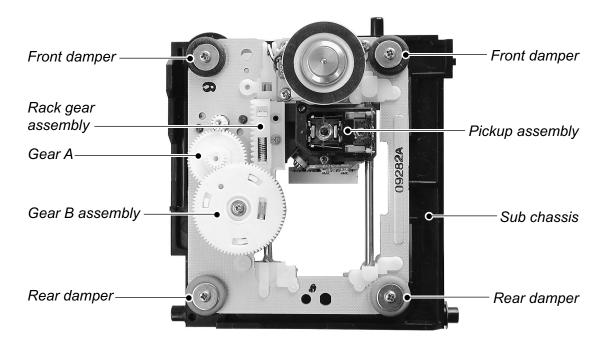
Pickup mechanism chassis assembly (Top side)
